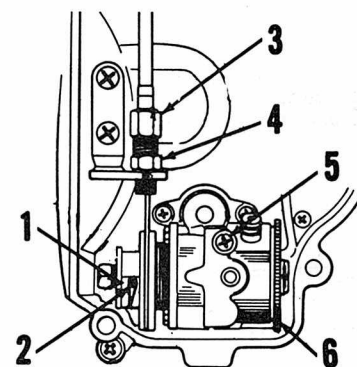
Throttle should be held open during bleeding to speed the operation.
